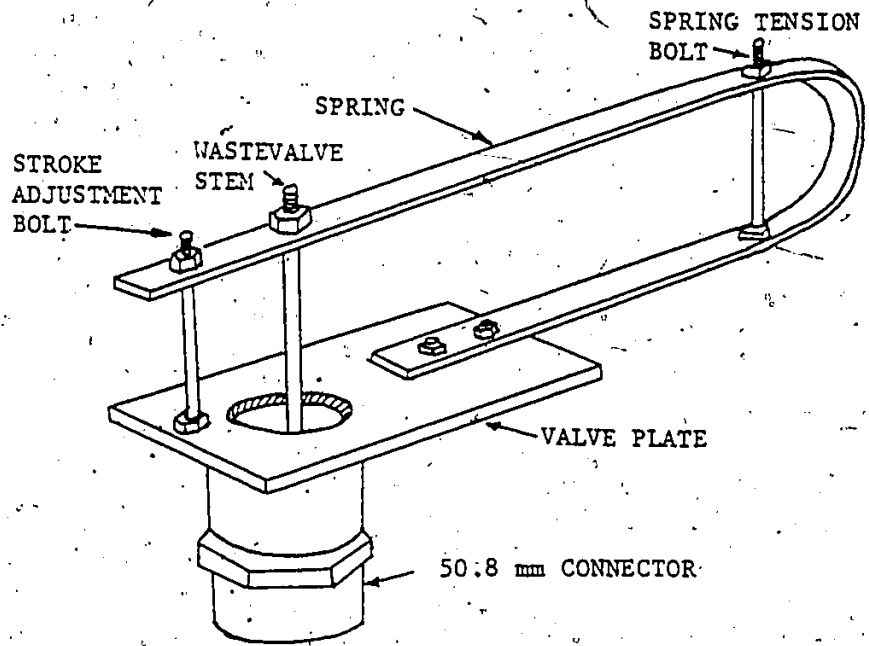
ORIGINAL SPRING-TYPE IMPULSE VALVE FOR THE LOCALLY MADE ITDG HYDRAM
